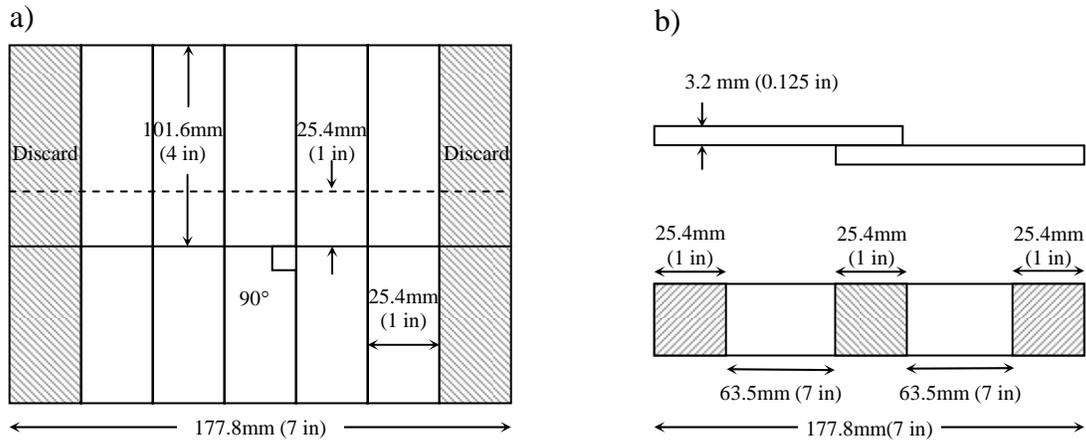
a) Standard Test Panel and b) Specimen for Shear testing
